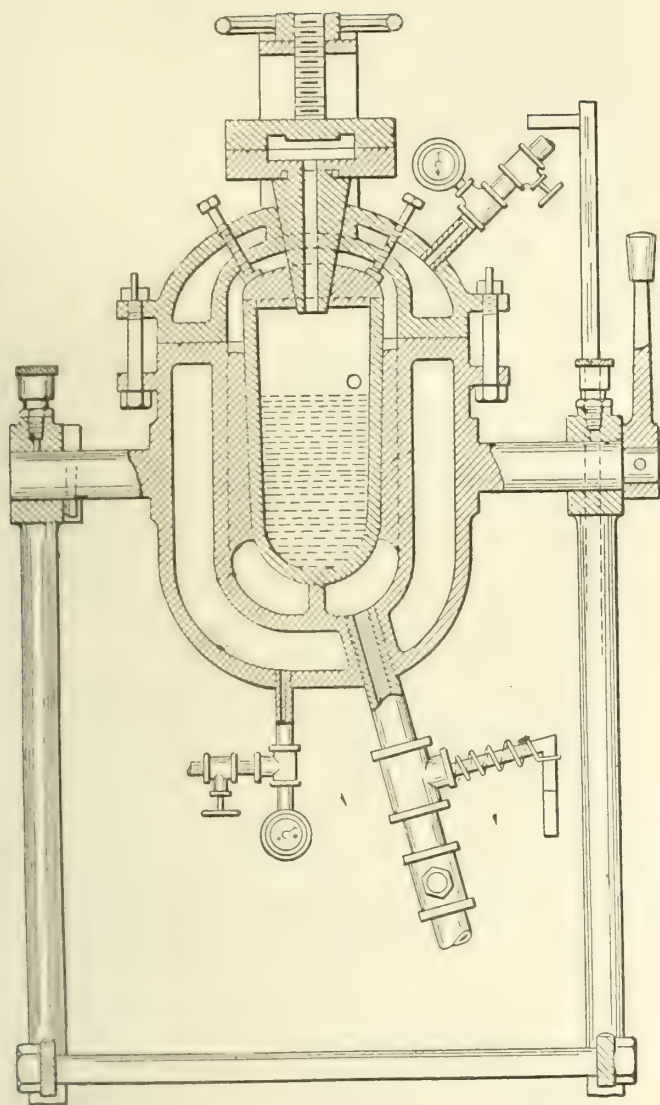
CHANDLER DIE-CASTING MACHINE.
